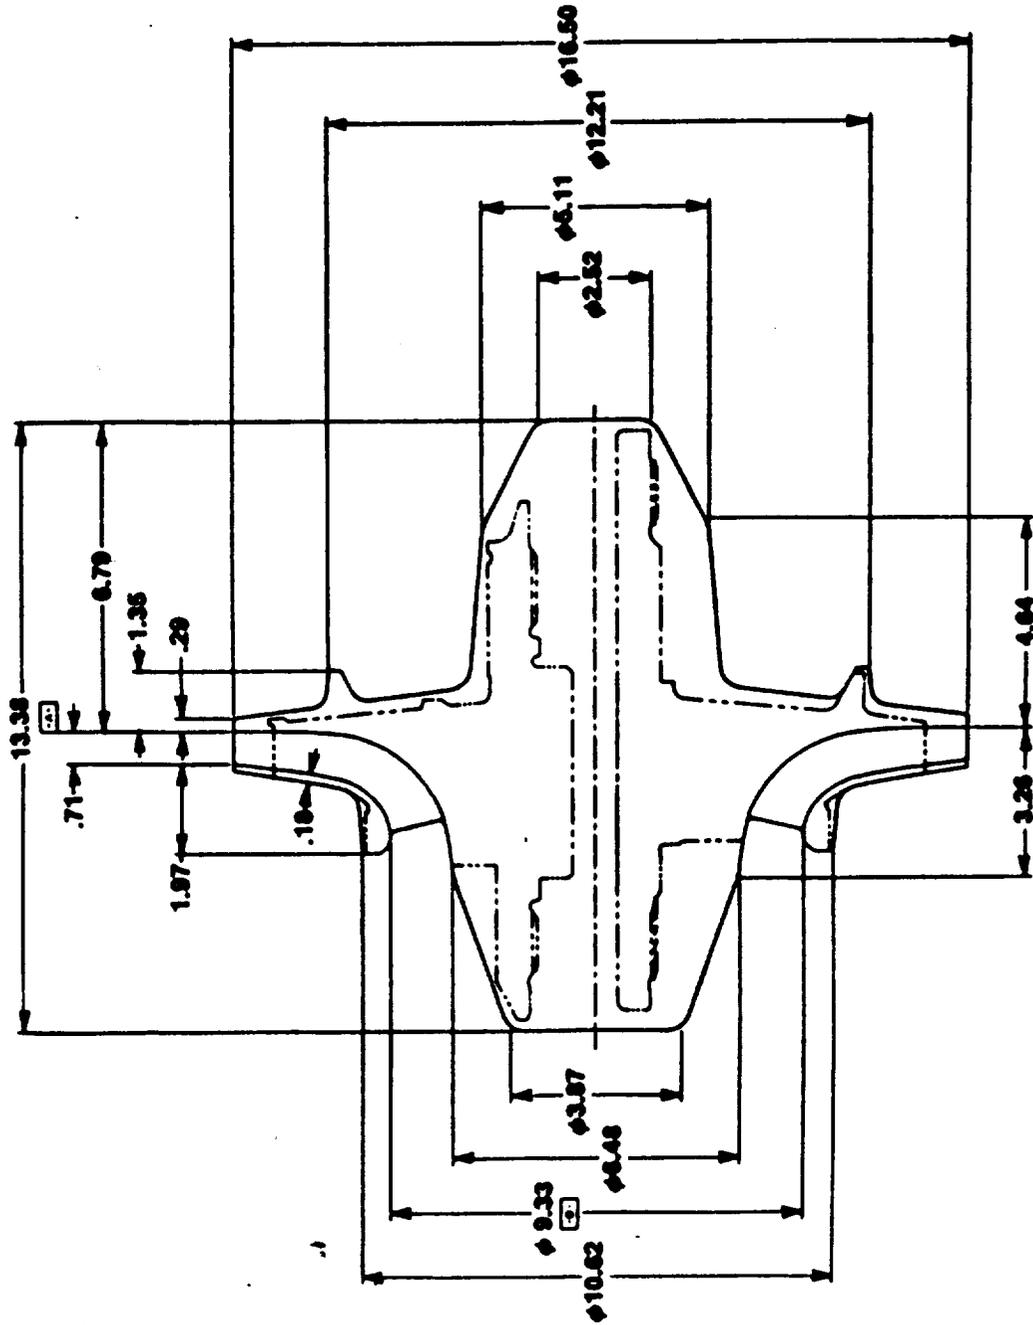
CAD Drawing For Cast Titanium Impeller
